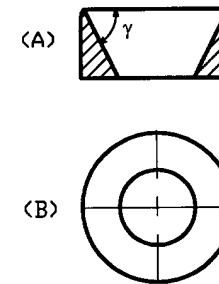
Sectional view (A) and top view (B) of wedge 32 of the trigger one
